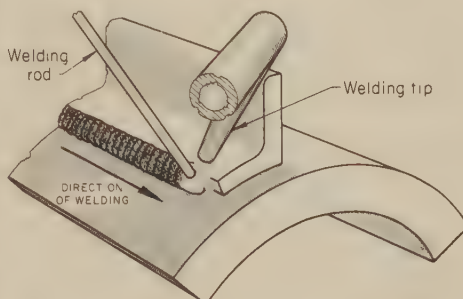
Technique for preventing cold laps and oxide inclusions in welding unequal sections, by directing the flame at thicker and continuous section
